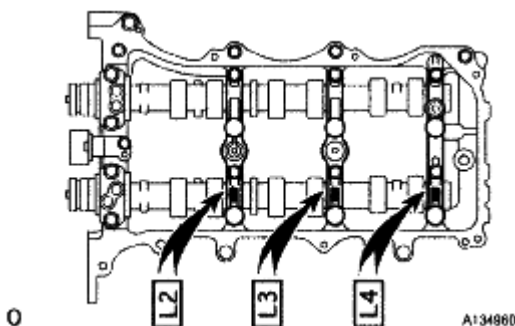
Identifying Marks & Numbers On Camshaft Bearing Caps
